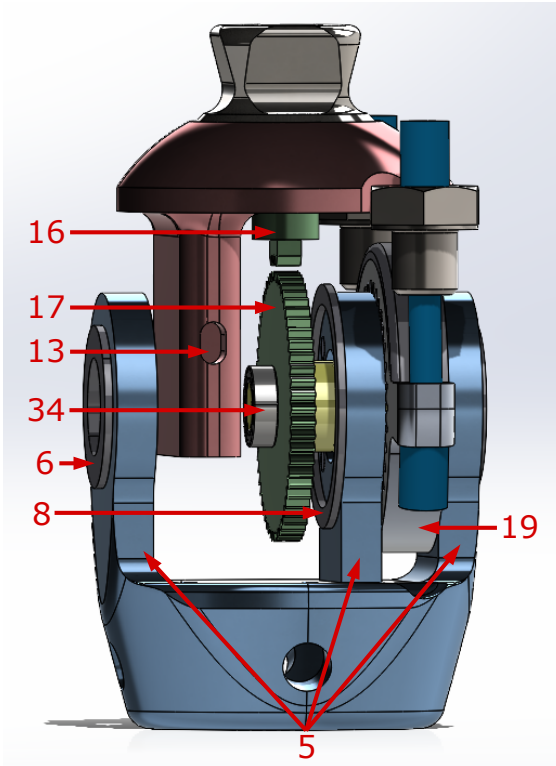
Lateral view of the CAD design excluding the upper structure. (5) Forks of the lower structure, (6) Plain bearing for guidance, (8) Thrust washer, (13) Mechanical stop of the top slider, (16) Locking pawl, (17) Locking gear, (19) Ring gear, (34) Sun bearing.
